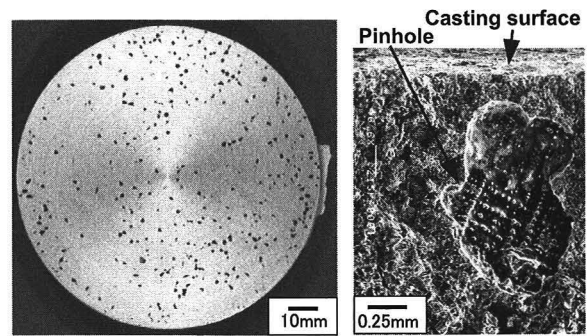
Pinhole defects under casting surface of cast iron.
